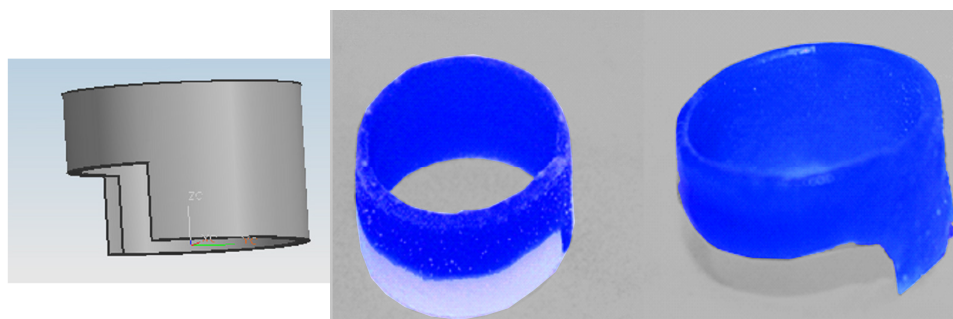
A cylinder built in -23°C ambient: (a) CAD model, (b) before support material removal and (c) after support material removal
